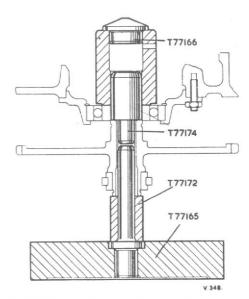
Pressing the valve box mounting plate on to the circulating pump driving gear
